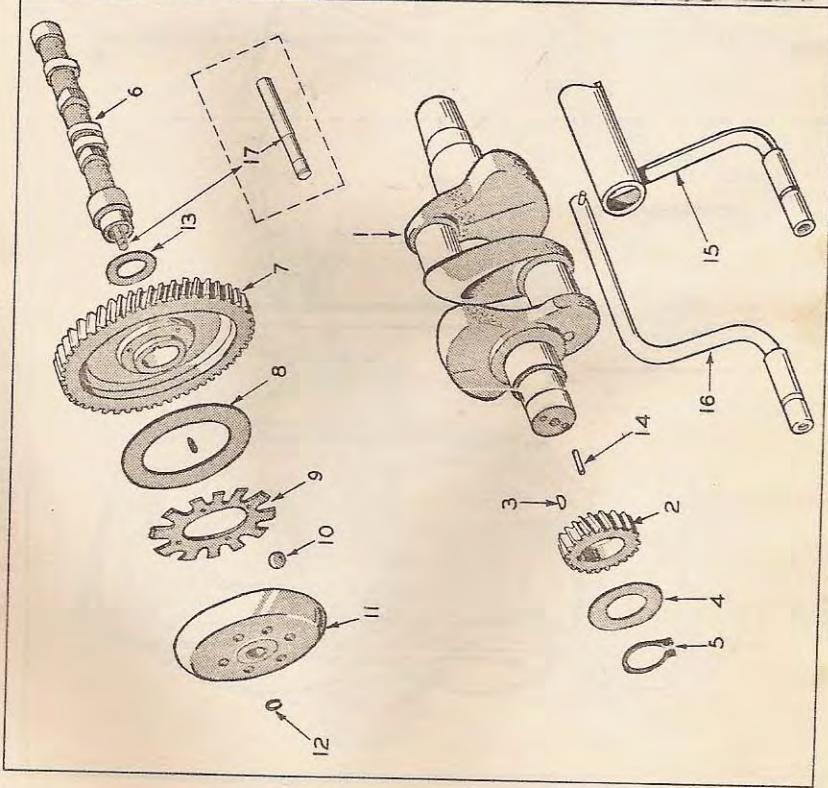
CRANKSHAFT & CAMSHAFT GROUP
